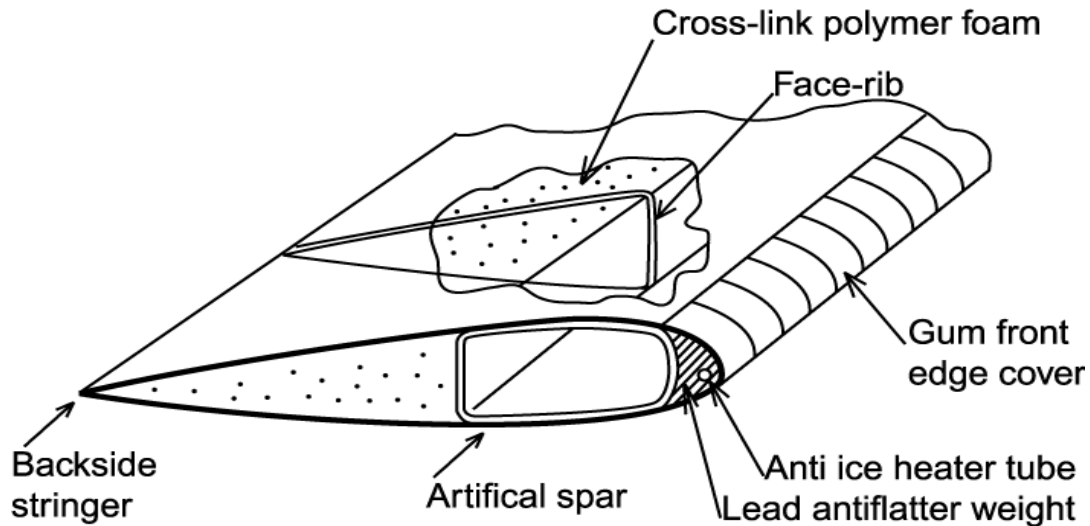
The Inner Structure of the Ka-26 Rotor Blade.
